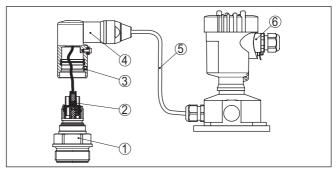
VEGABAR 83 in IP68 version, 25 bar and lateral cable outlet, external housing
